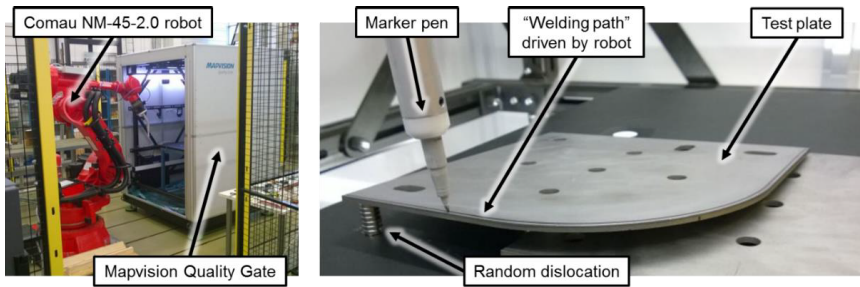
The welding path was adjusted based on measurement feedback. (Publ. V)
